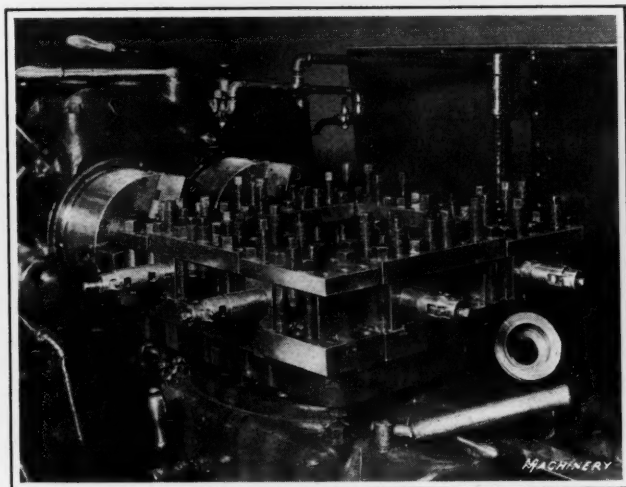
Tooling of First and Second Turret Faces of Flat Turret Lathe used for machining Differential Gear Cases
